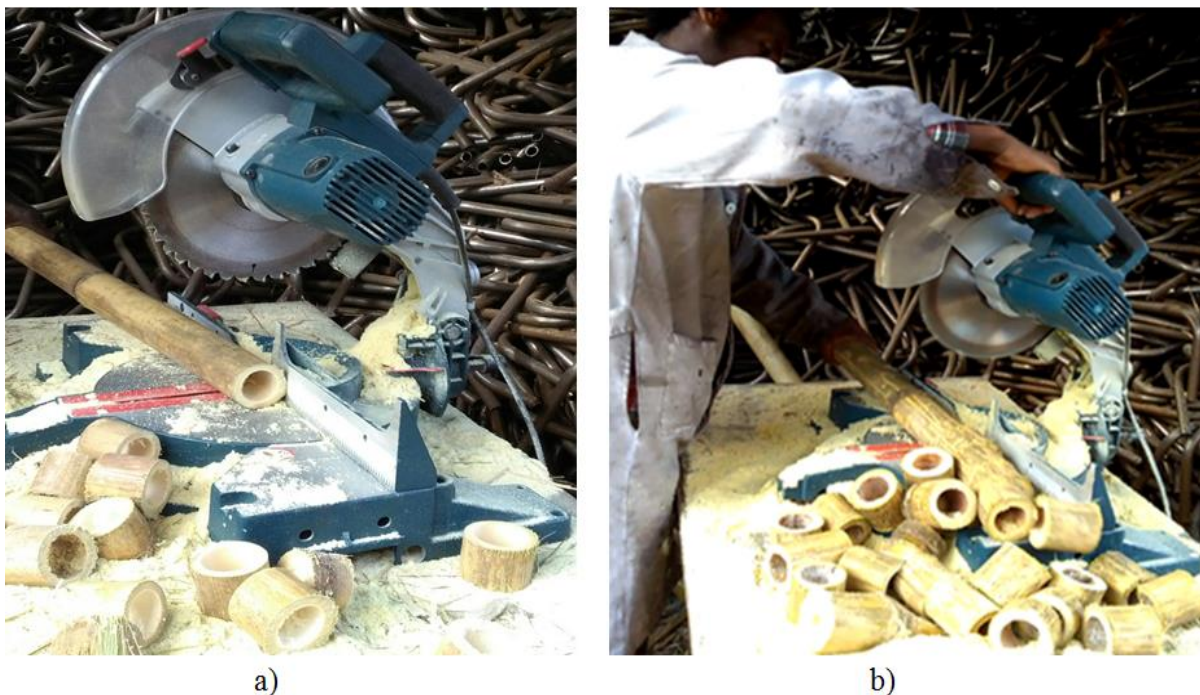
a) power saw, b) Bamboo culm cut into desirable pieces
